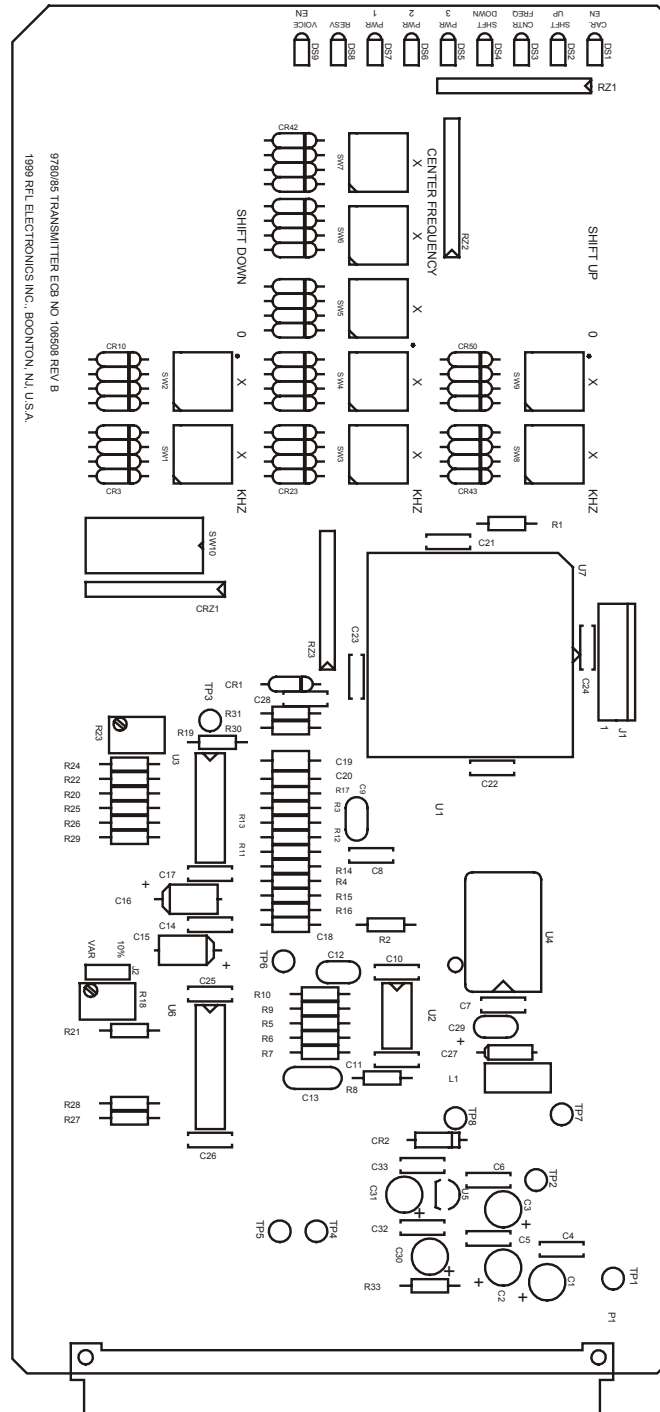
Component locator dwg, RFL 9785 Transmitter Module (Assy No. 106505, Circuit Board No. D-106508, Rev. B)
